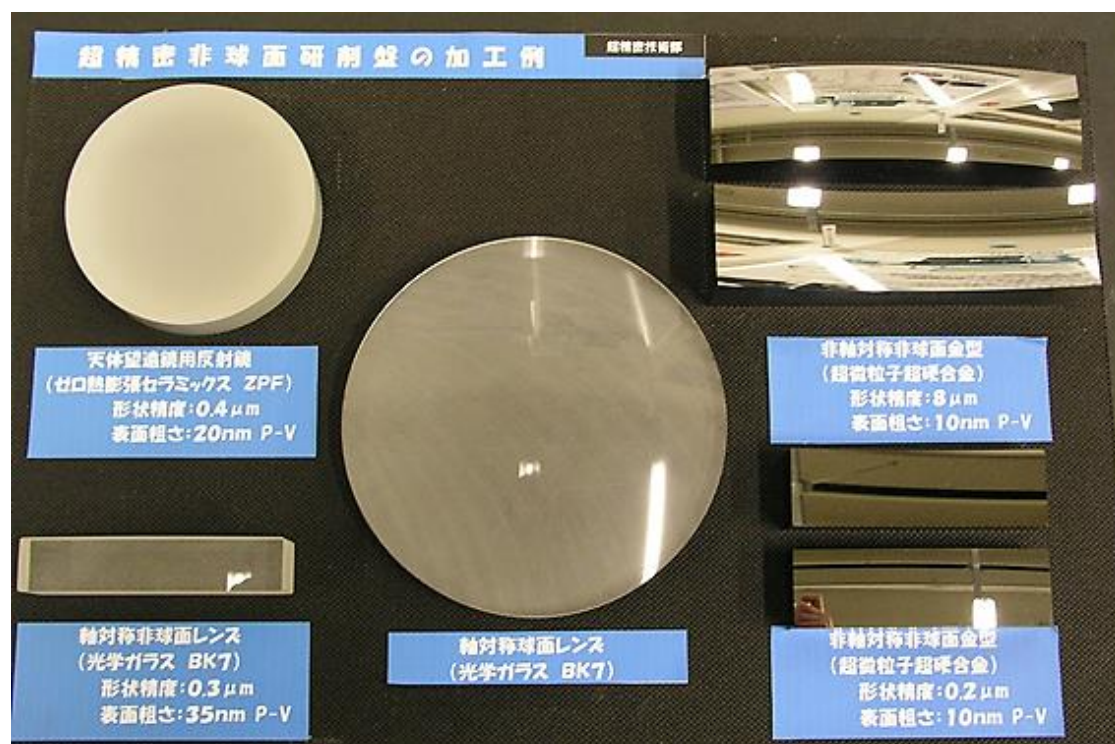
Photograph of workpieces finished by ultra-precision grinding.
